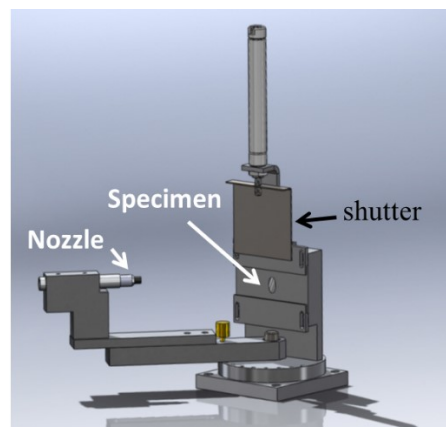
Schematic of sample and nozzle holder for SPE testing with retractable shutter [103].
